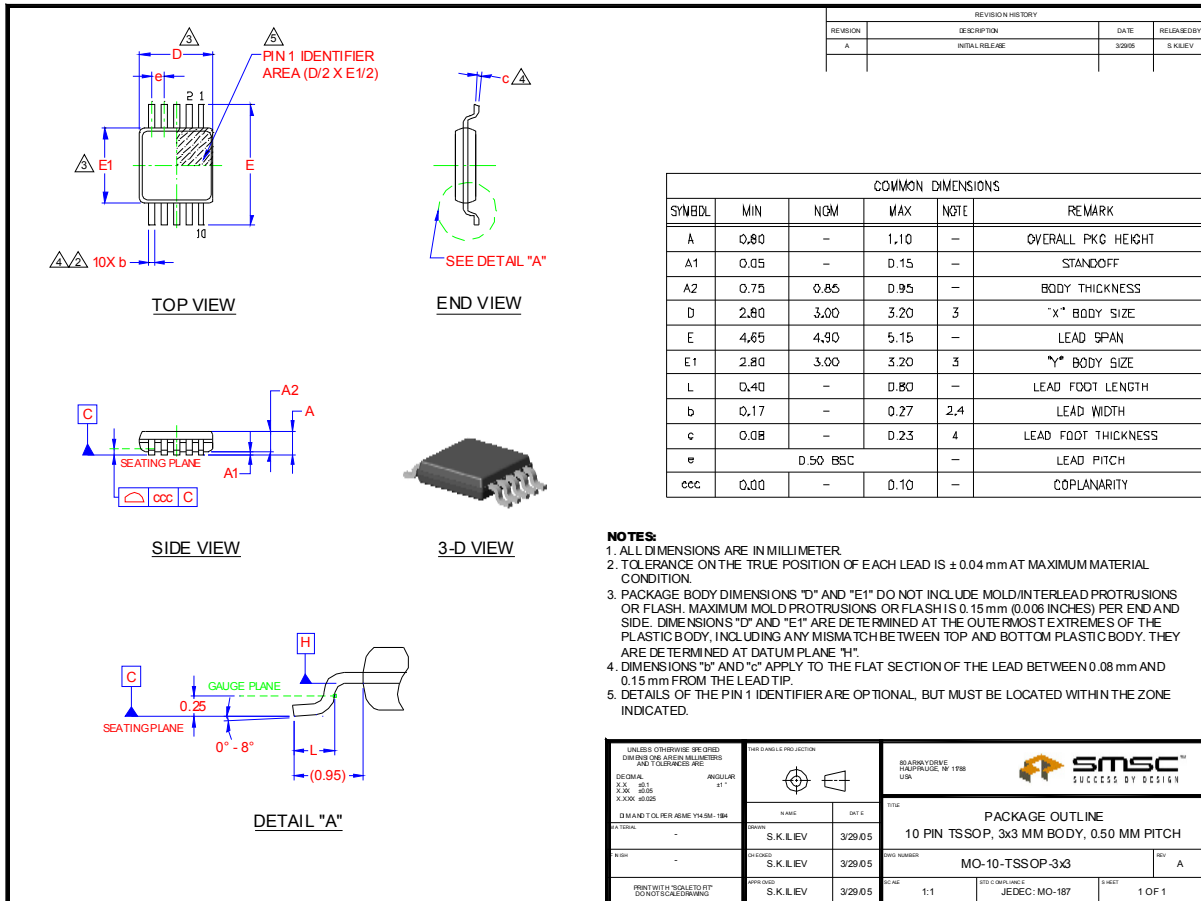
EMC2302 Package Drawing - 10-Pin MSOP
